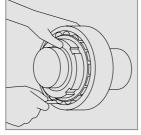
Checking bearing clearance with bearing mounted on shaft.
